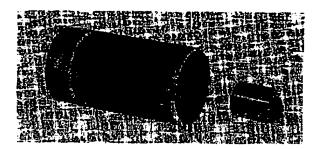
Projectile assembly showing lexan sabot on the left and FSP on the right
